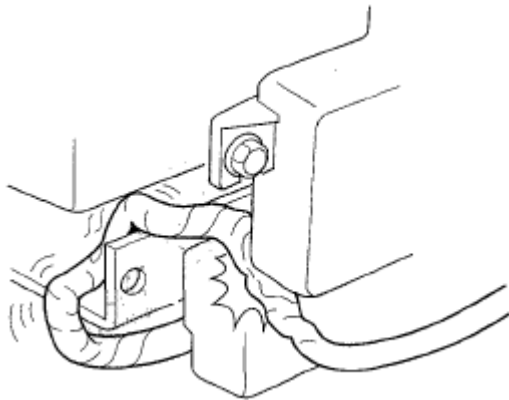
Wiring Precaution - Check Harness Wires Do Not Get Pinched Or Interfere With Other Parts
